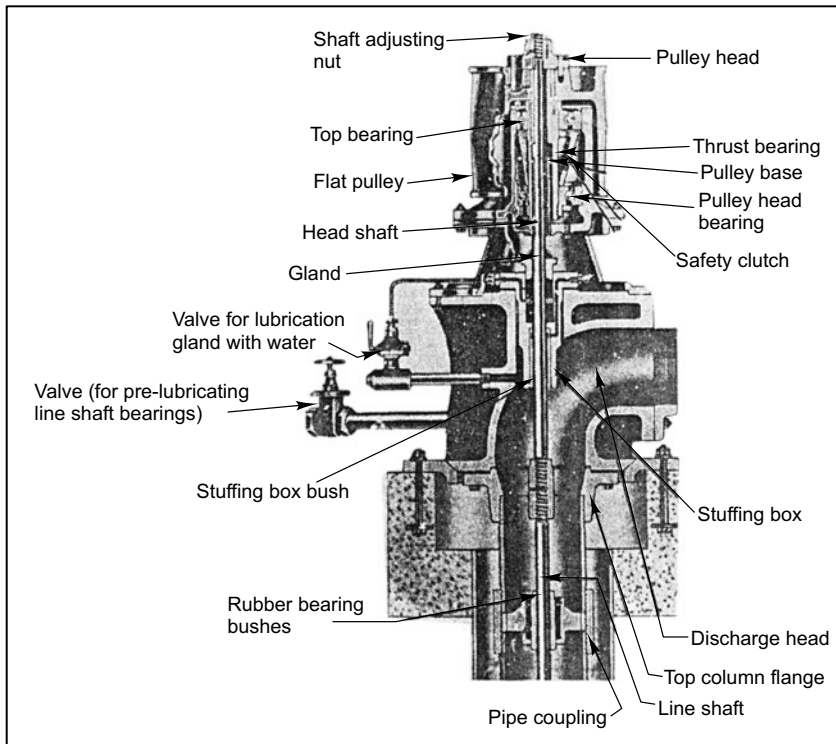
Pump head and flat belt pulley drive of water-lubricated vertical turbine pump
